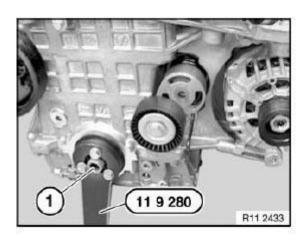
Identifying Central Bolt And Special Tool 11 9 280 Courtesy of BMW OF NORTH AMERICA, INC.
